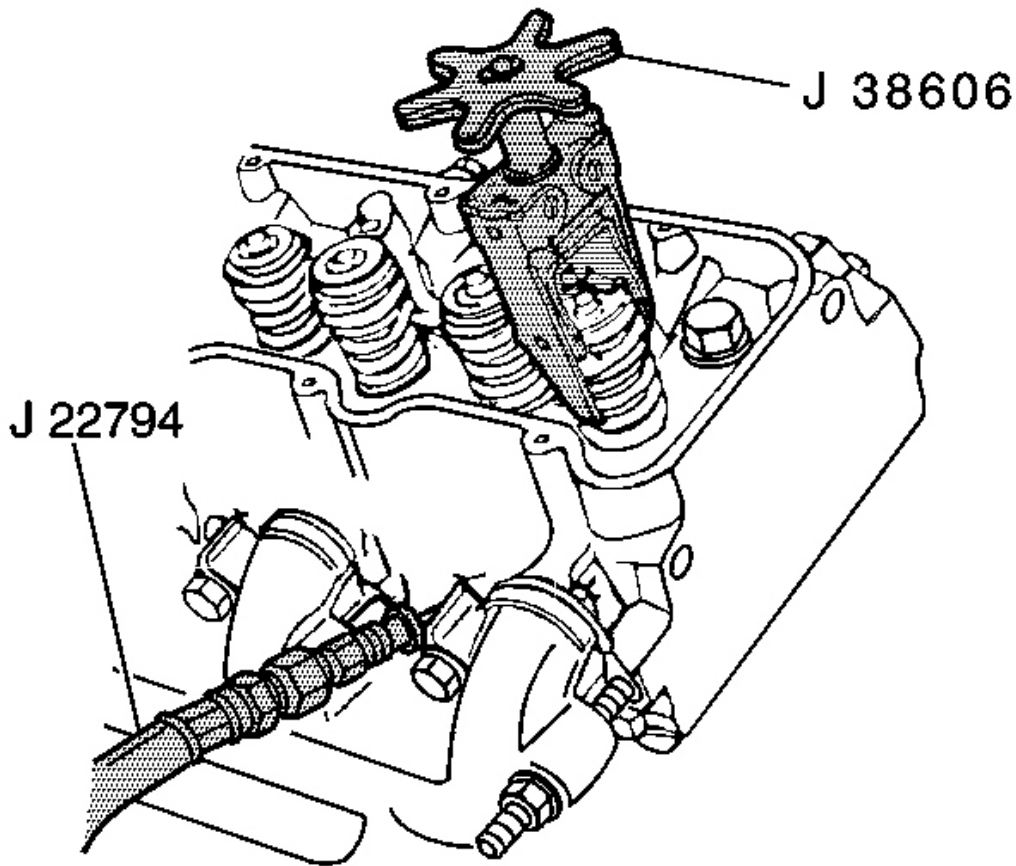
View Of J 38606 & J 5892-D Compressing Valve Spring
